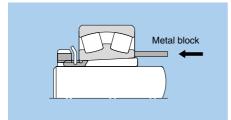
Removal of Bearing W/Adapter Sleeve
